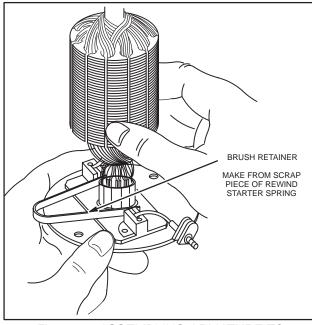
ASSEMBLING ARMATURE TO END CAP
